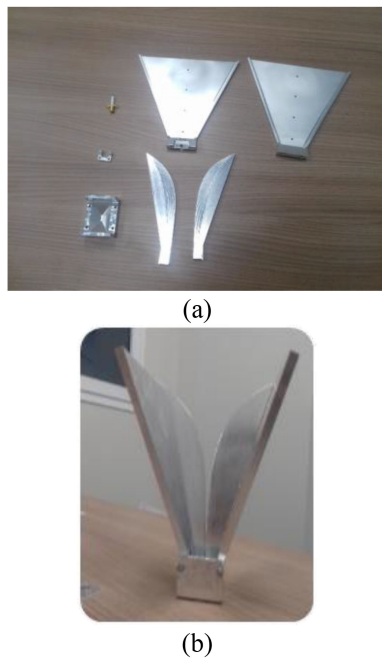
Fabricated prototype: (a) Designed DRH antenna pieces; (b) assembled DRH antenna. The antenna is made of aluminum and realized by milling technique.
